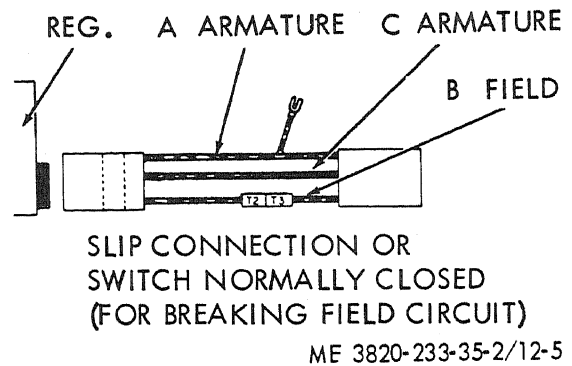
Suggested special testing harness No. 1 for electrical checking.
